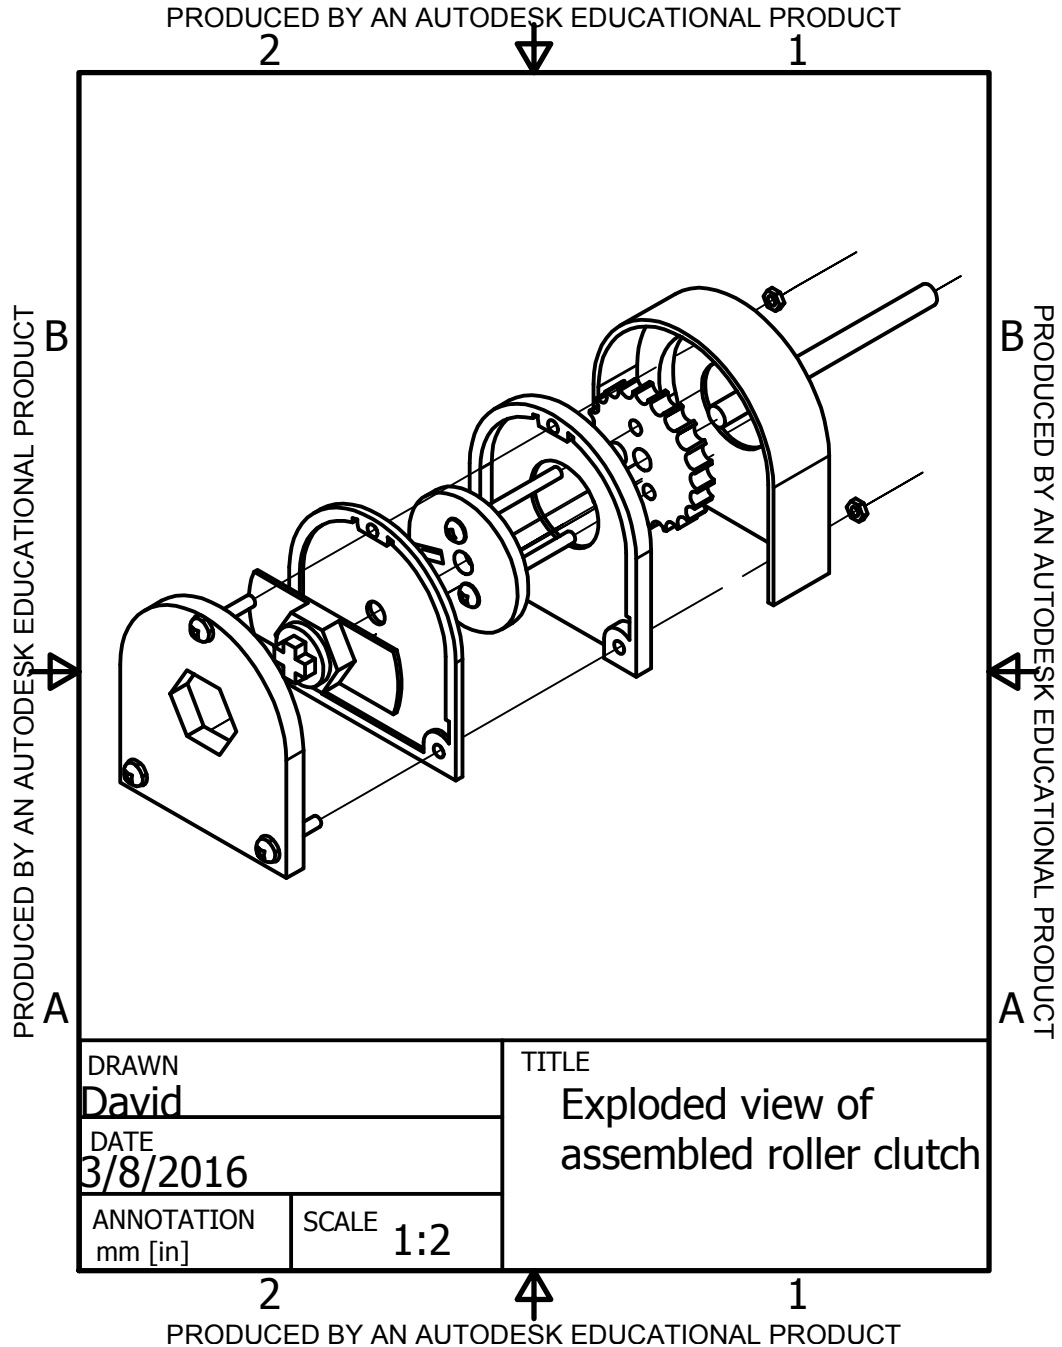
Exploded view of the roller clutch. The enclosure layers are fastened with three 3/4" 6-32 screws and captive nuts. An axle is anchored with the axle adapter. The wire wheel and gear are linked with two long 6-32 screws but rotate around the axle.
